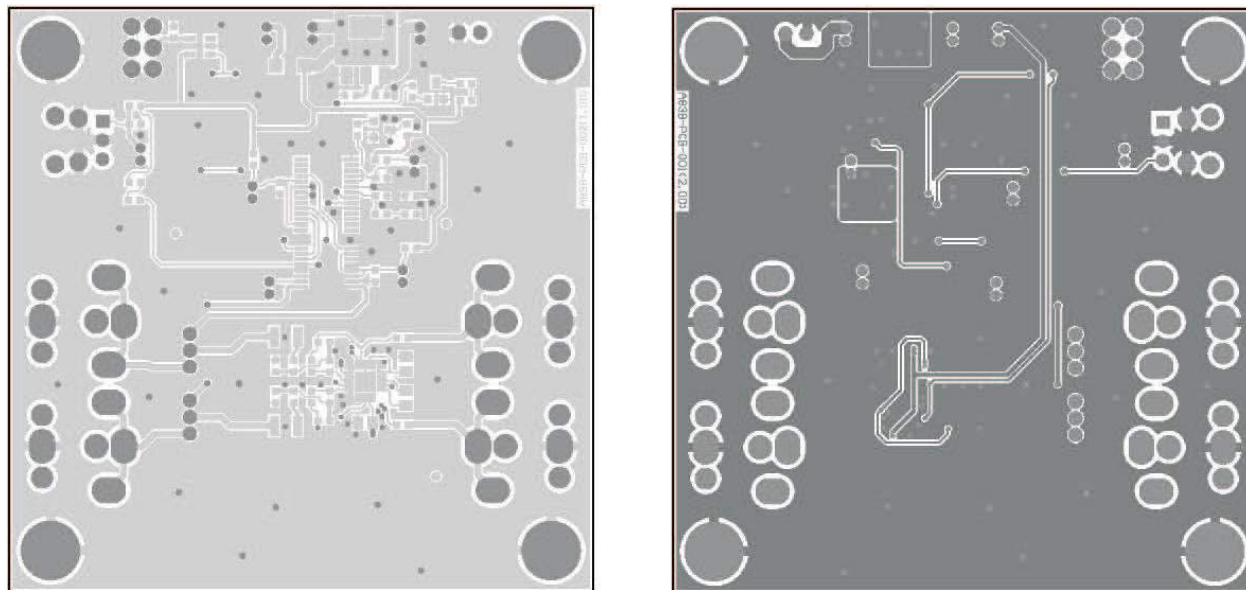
DRV601EVM2 PCB Top and Bottom Layers
